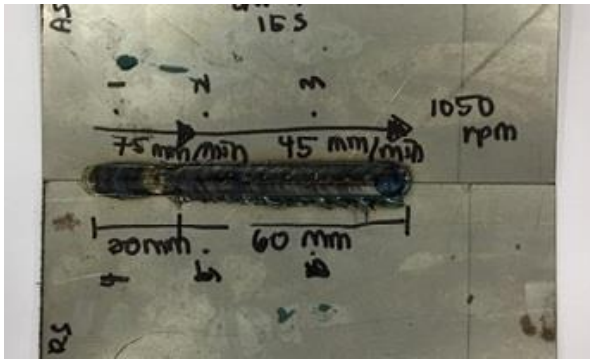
Visual inspection of this study; 1050rpm with 75mm/min and 45mm/min.
